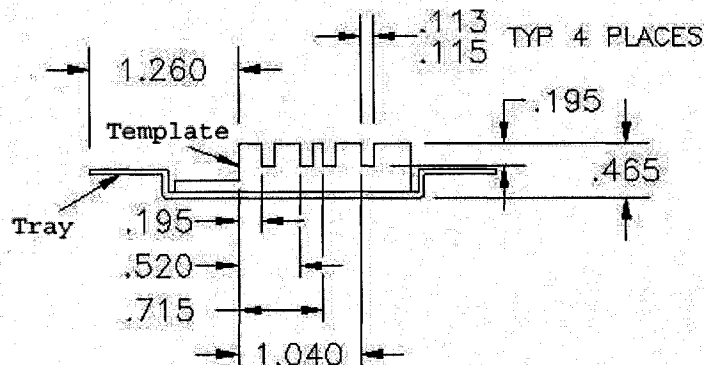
Cross Sectional Assembly Drawing of Klein 5410 Acoustic Array
